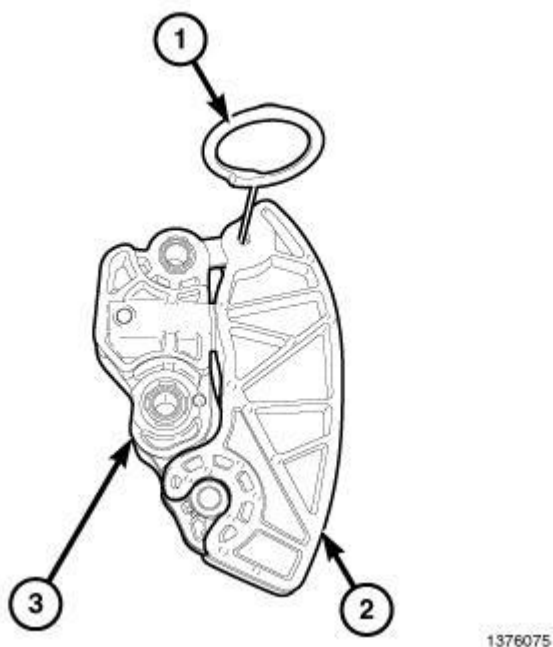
Tensioner Pin, Guide Shoe & Tensioner Body
